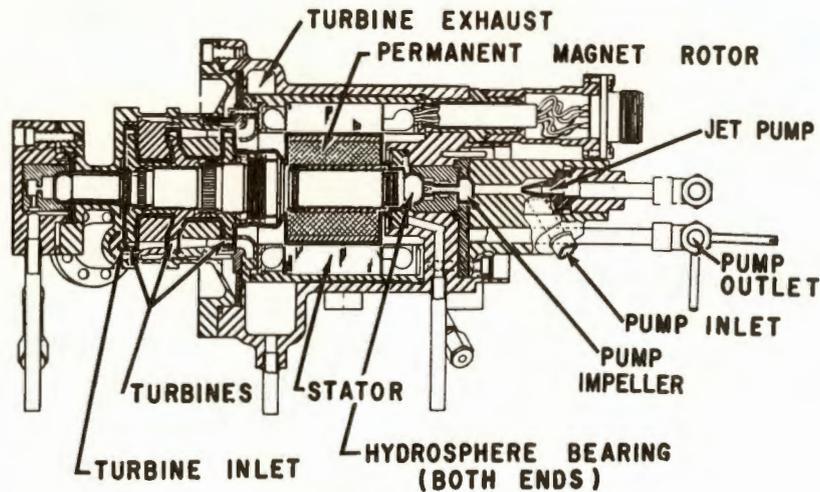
SNAP I TURBOMACHINERY PACKAGE
